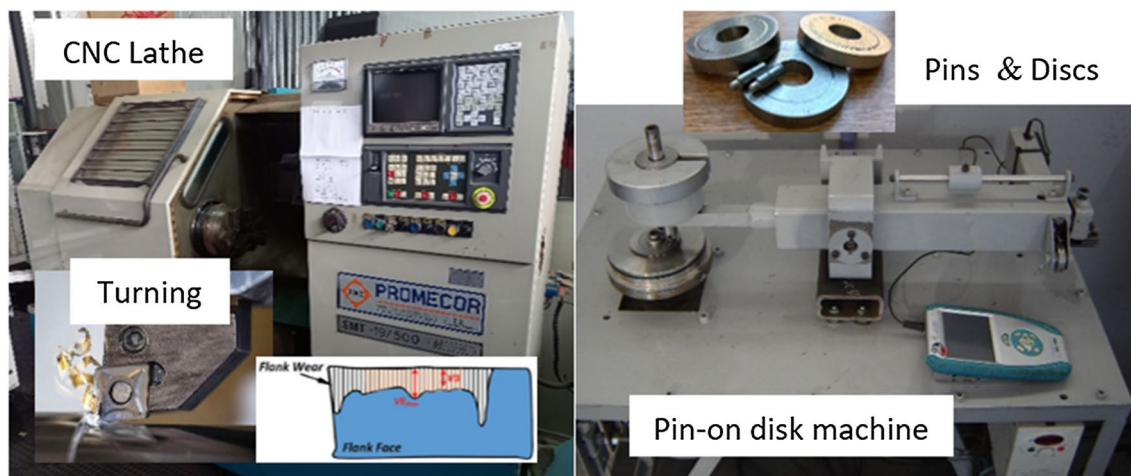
Schematic of the machines and tools used to perform the wear experiments
